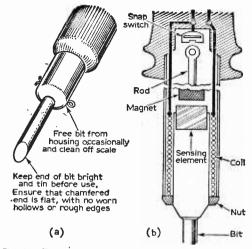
The iron bit should be kept well shaped, as shown here.
